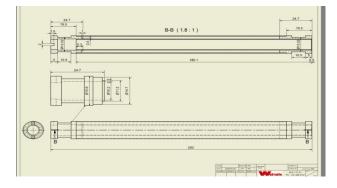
Drawing of the fuel rod welding specimen components.
